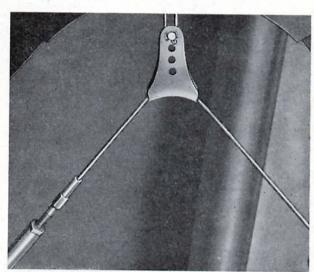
Parking brake cable adjusting sleeve and bridle. Note the three additional holes in the bridle for adjustment
